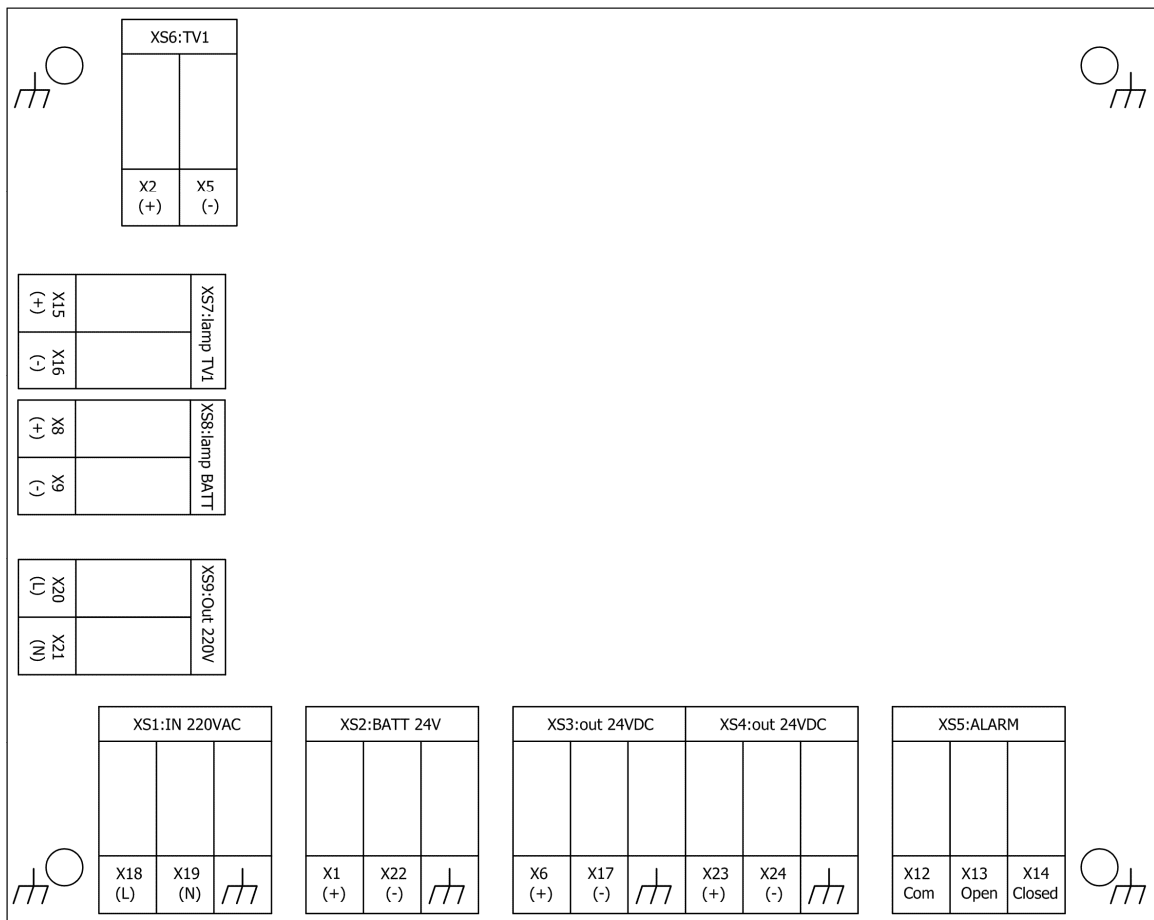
Terminal assembly layout on the printed circuit of PSU
